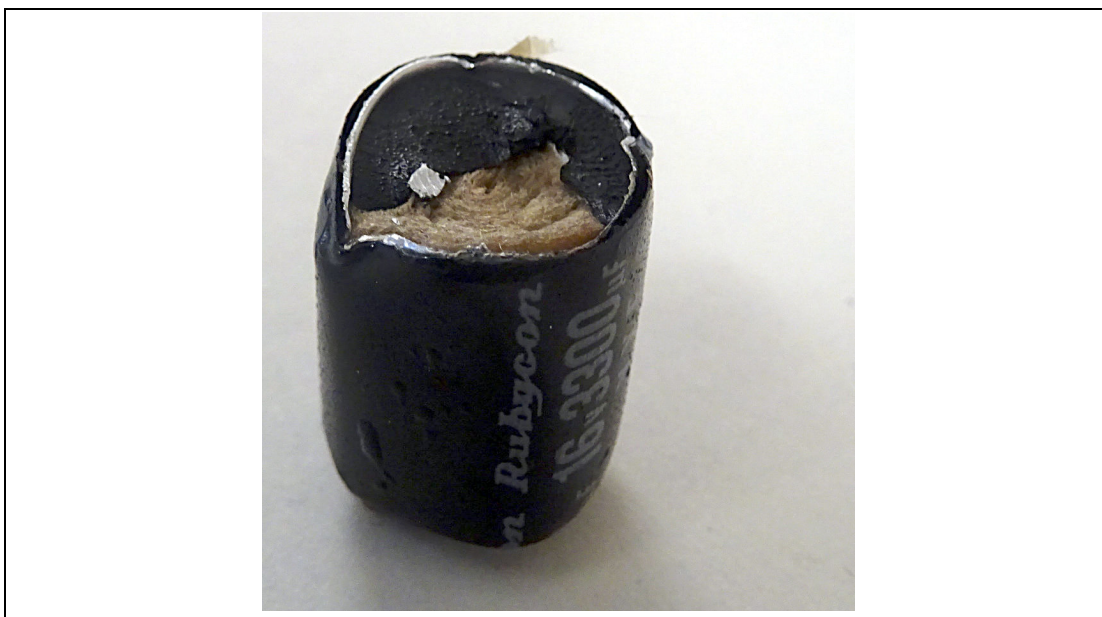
Aluminium e-cap, cover removed; view of bitumen seal and coil
